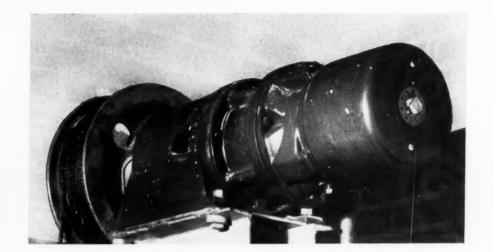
An electrically actuated disk brake, mounted on the high speed shaft of this gear - motor operated hoist, affords quick, safe and simple means for remote control of stopping and lowering
